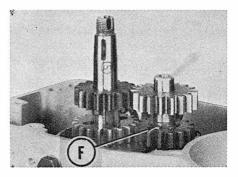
In third gear, pawls should be 0.02 inch above face of gears as shown. Refer to text.
